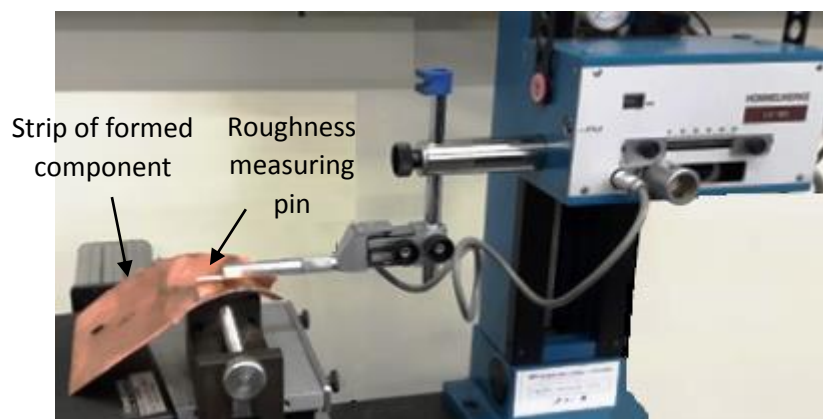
Machine used to measure the surface roughness of the formed conical geometry
